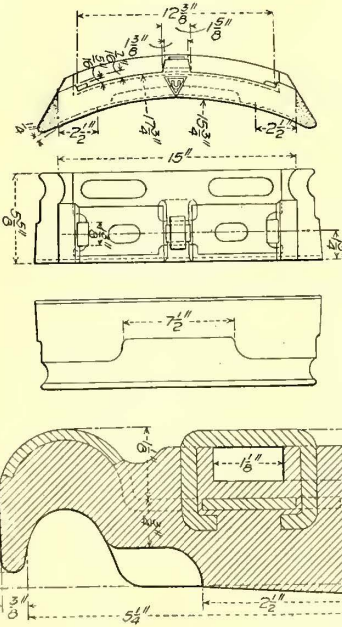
Motor and Trailer Shoe, Steel-Back "U" Type, Used Previous to March, 1908
